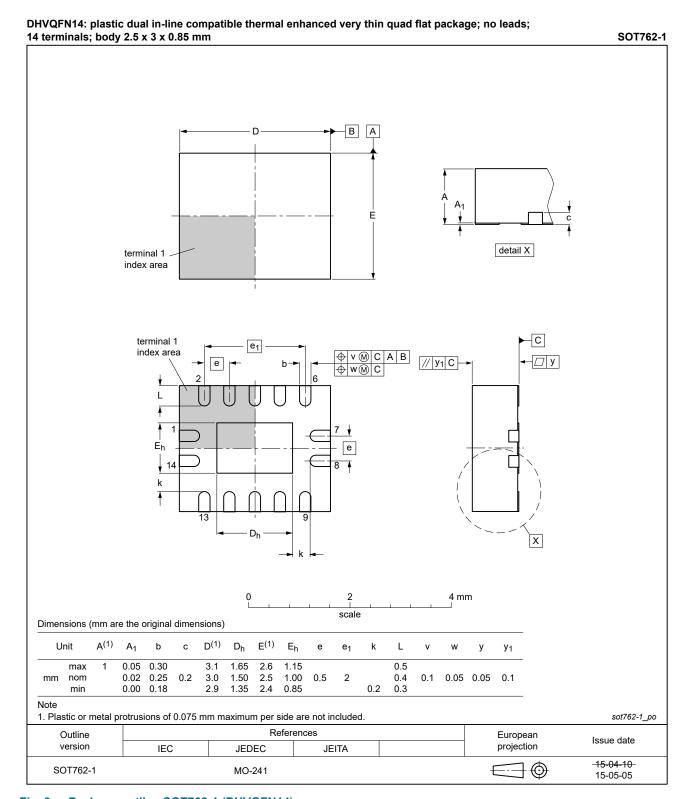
Package outline SOT762-1 (DHVQFN14)
